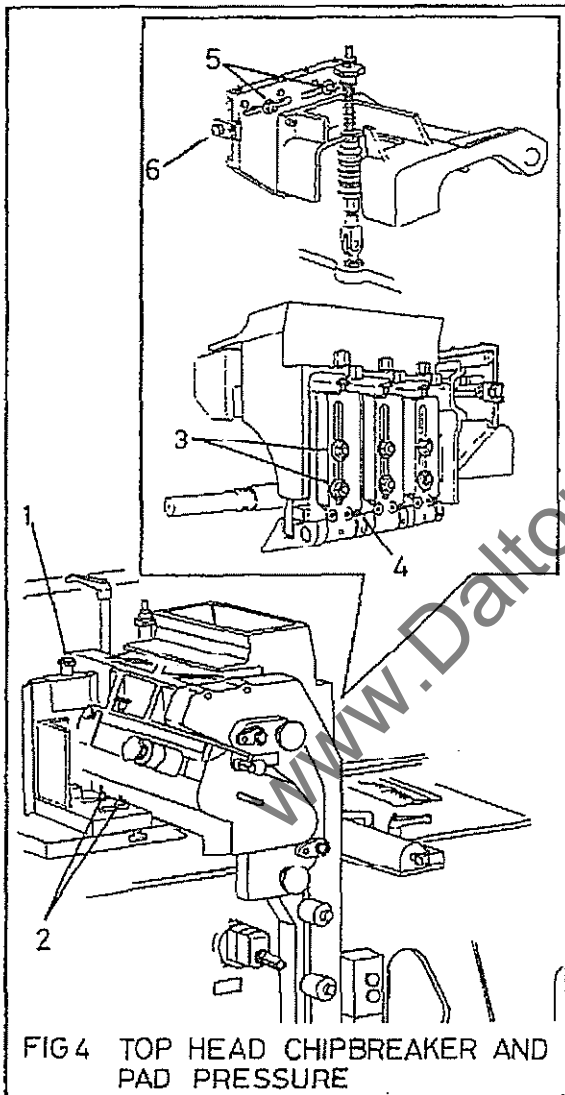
TOP HEAD CHIPBREAKER AND PAD PRESSURE
